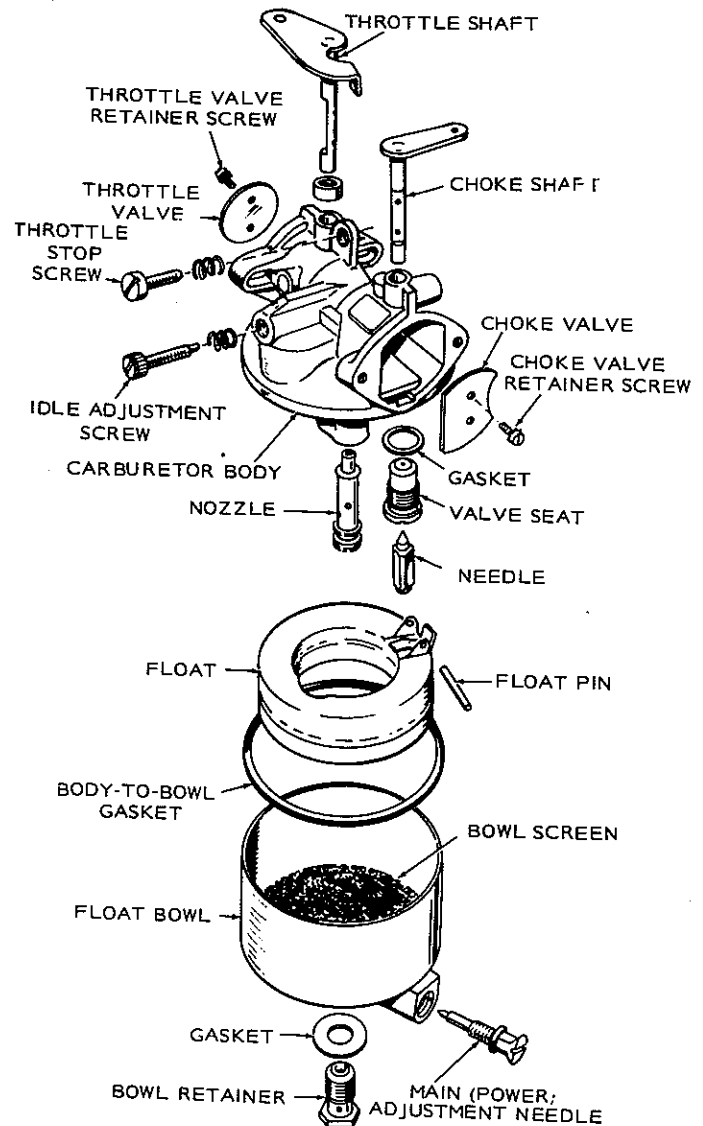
EXPLODED VIEW OF CARBURETOR
